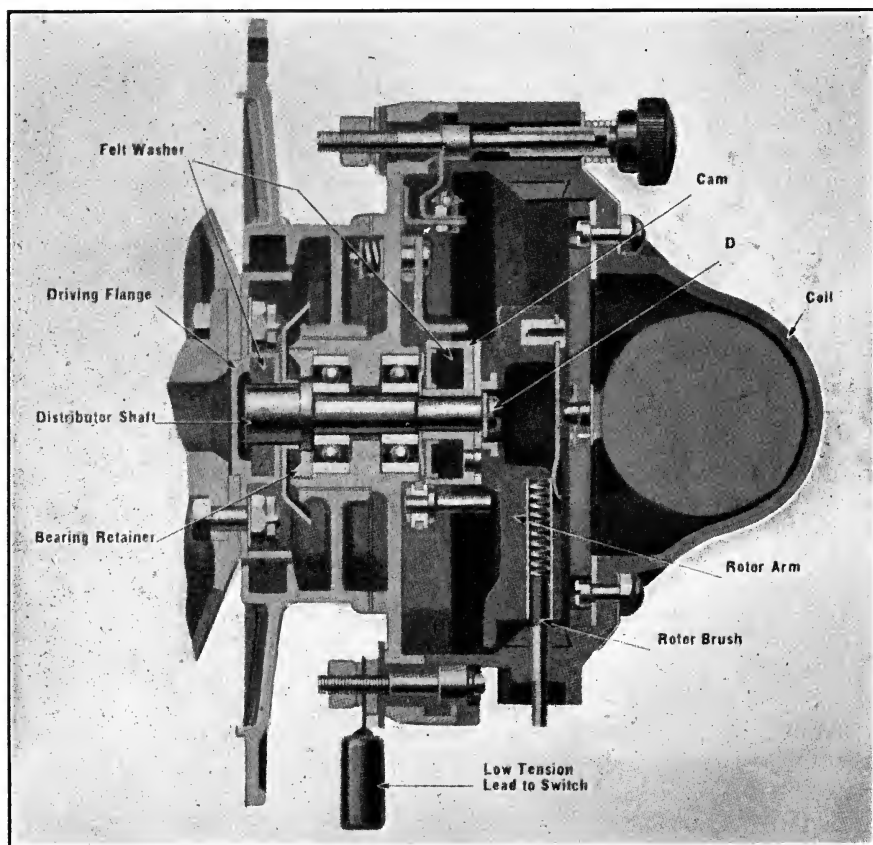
Cross section of Liberty Twelve aircraft engine distributor, showing location of coil.
